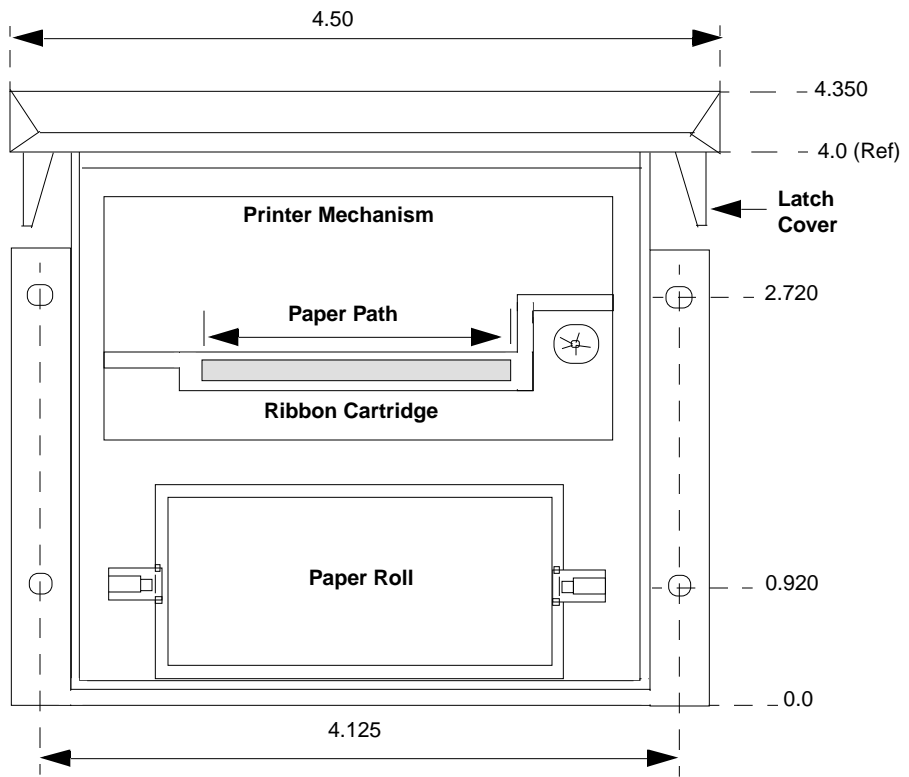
Printer Dimensions (Front View without Front Cover)
